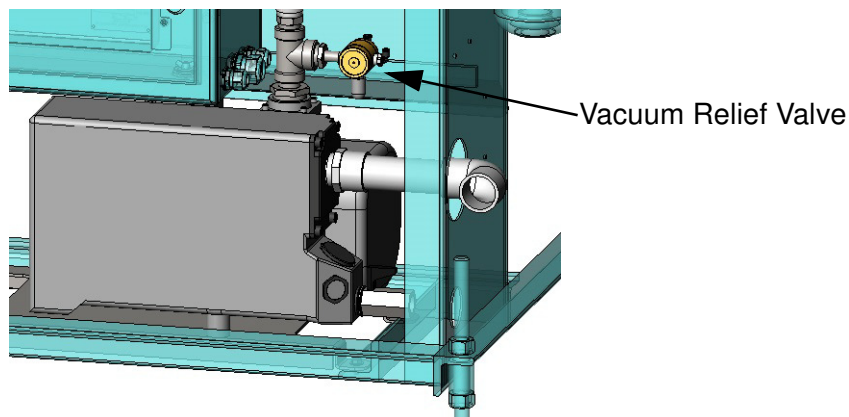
Vacuum Switch Relief Valve in Standard Configuration
